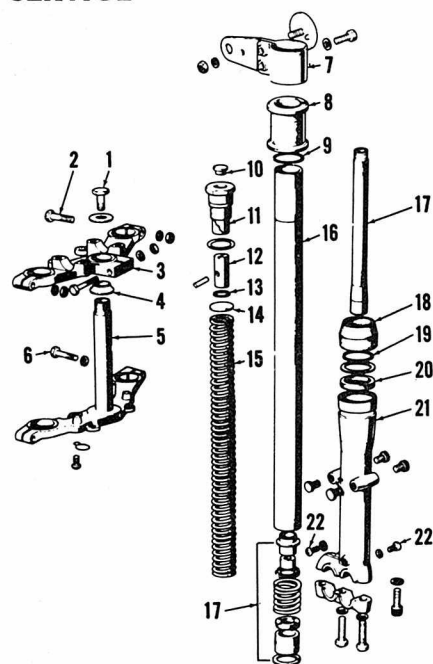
Exploded view of F5 front suspension unit. Other units are similar.
